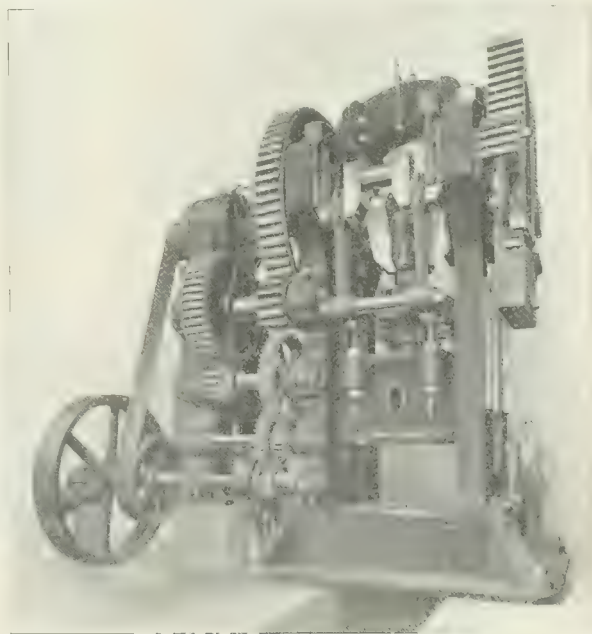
Rear View of a 400-Ton Double Acting Press, Showing Drive.
